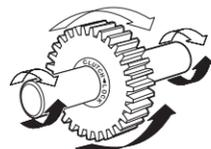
Lock function: shaft drives gear clockwise (white arrows) or gear can drive shaft counterclockwise (black arrows)
